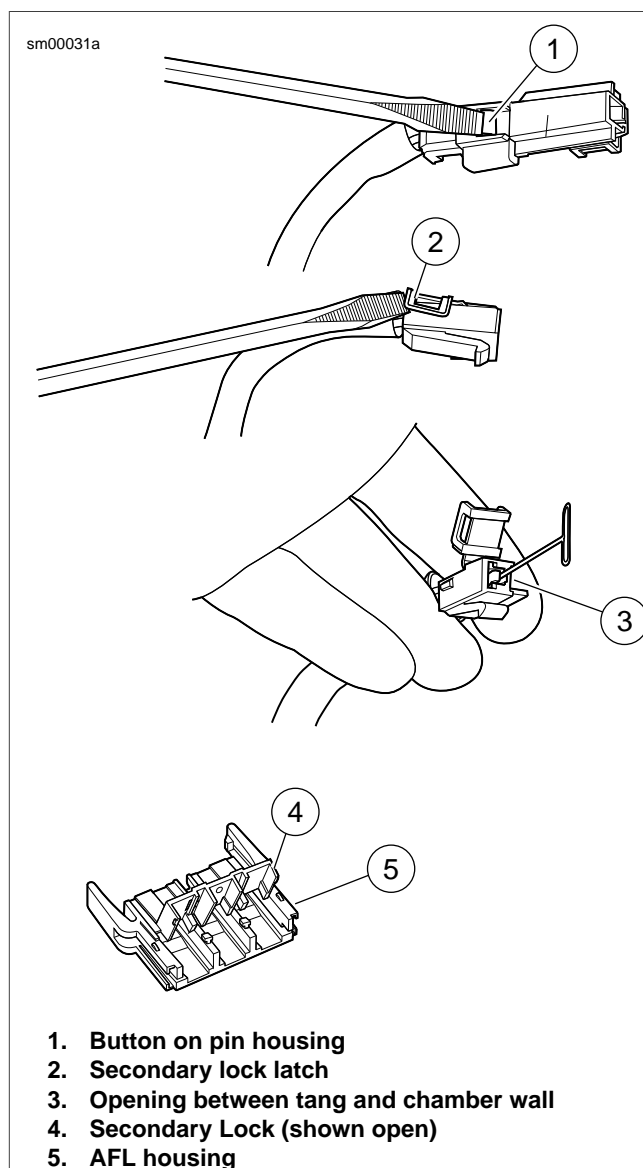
480 Metri-Pack Connector: Remove Socket Terminal
